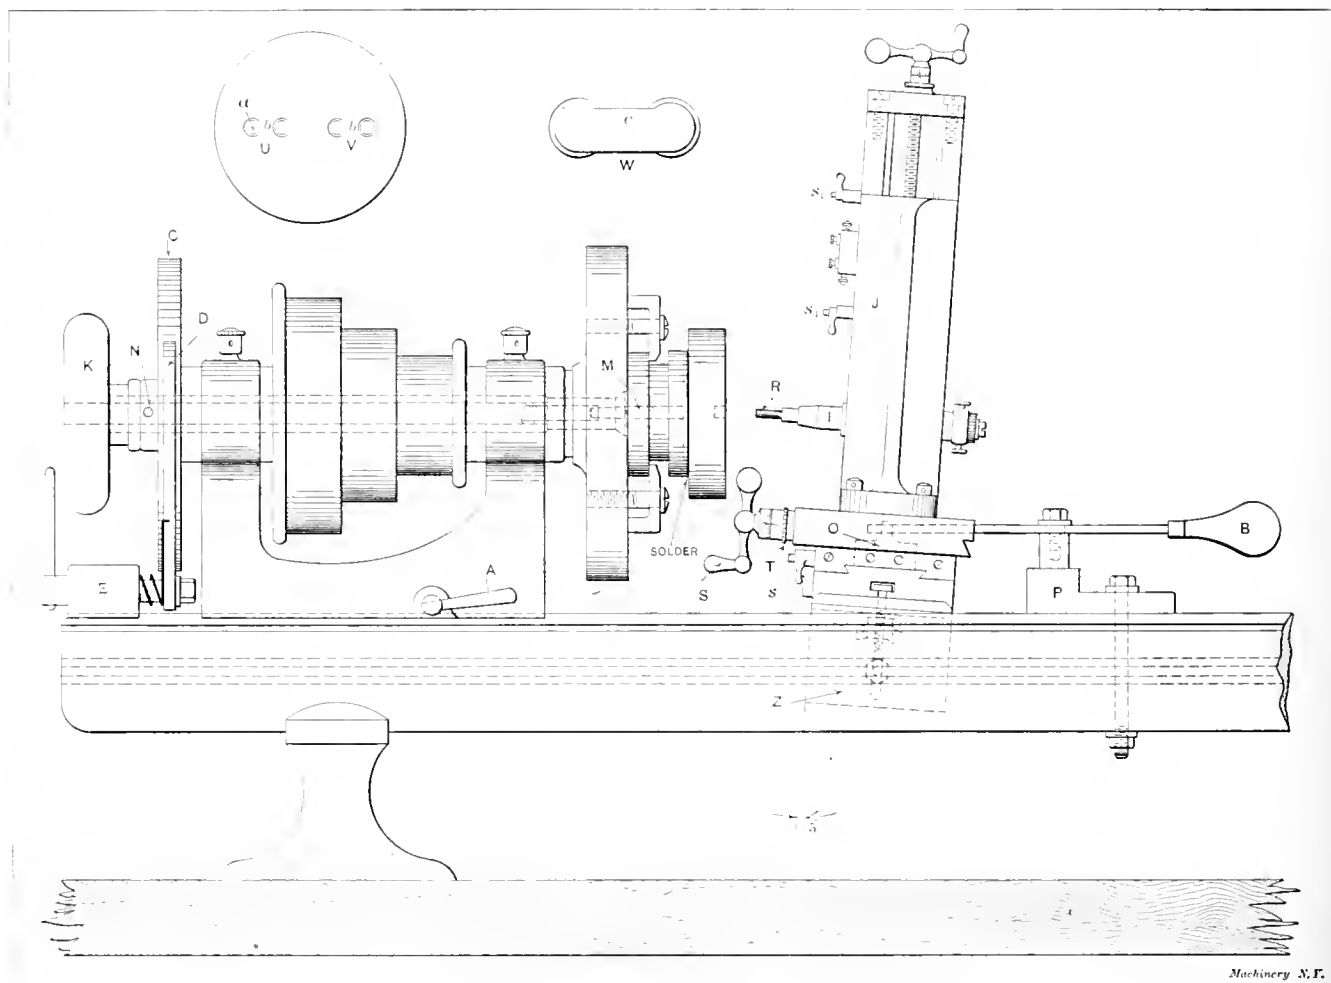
Bench Lathe equipped with Indexing and Milling Attachments
